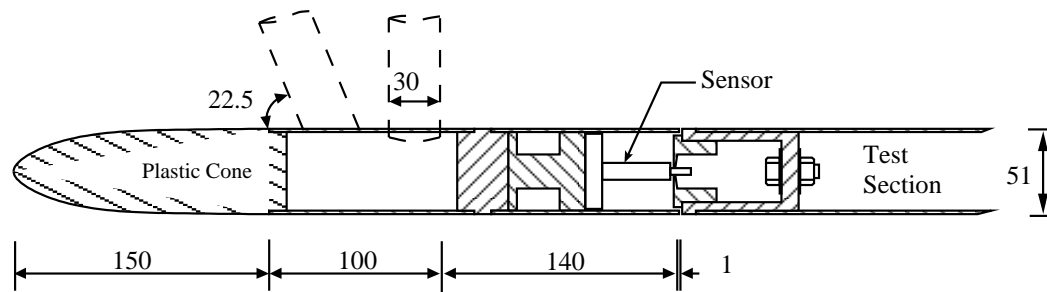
Model detail: End support and sensor housing. Measurements in mm and deg.
